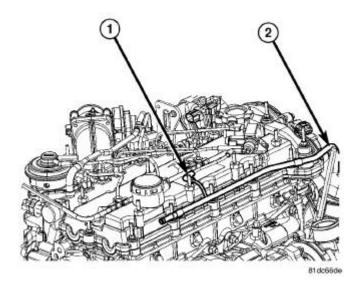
Vacuum Supply Tube Courtesy of CHRYSLER LLC
